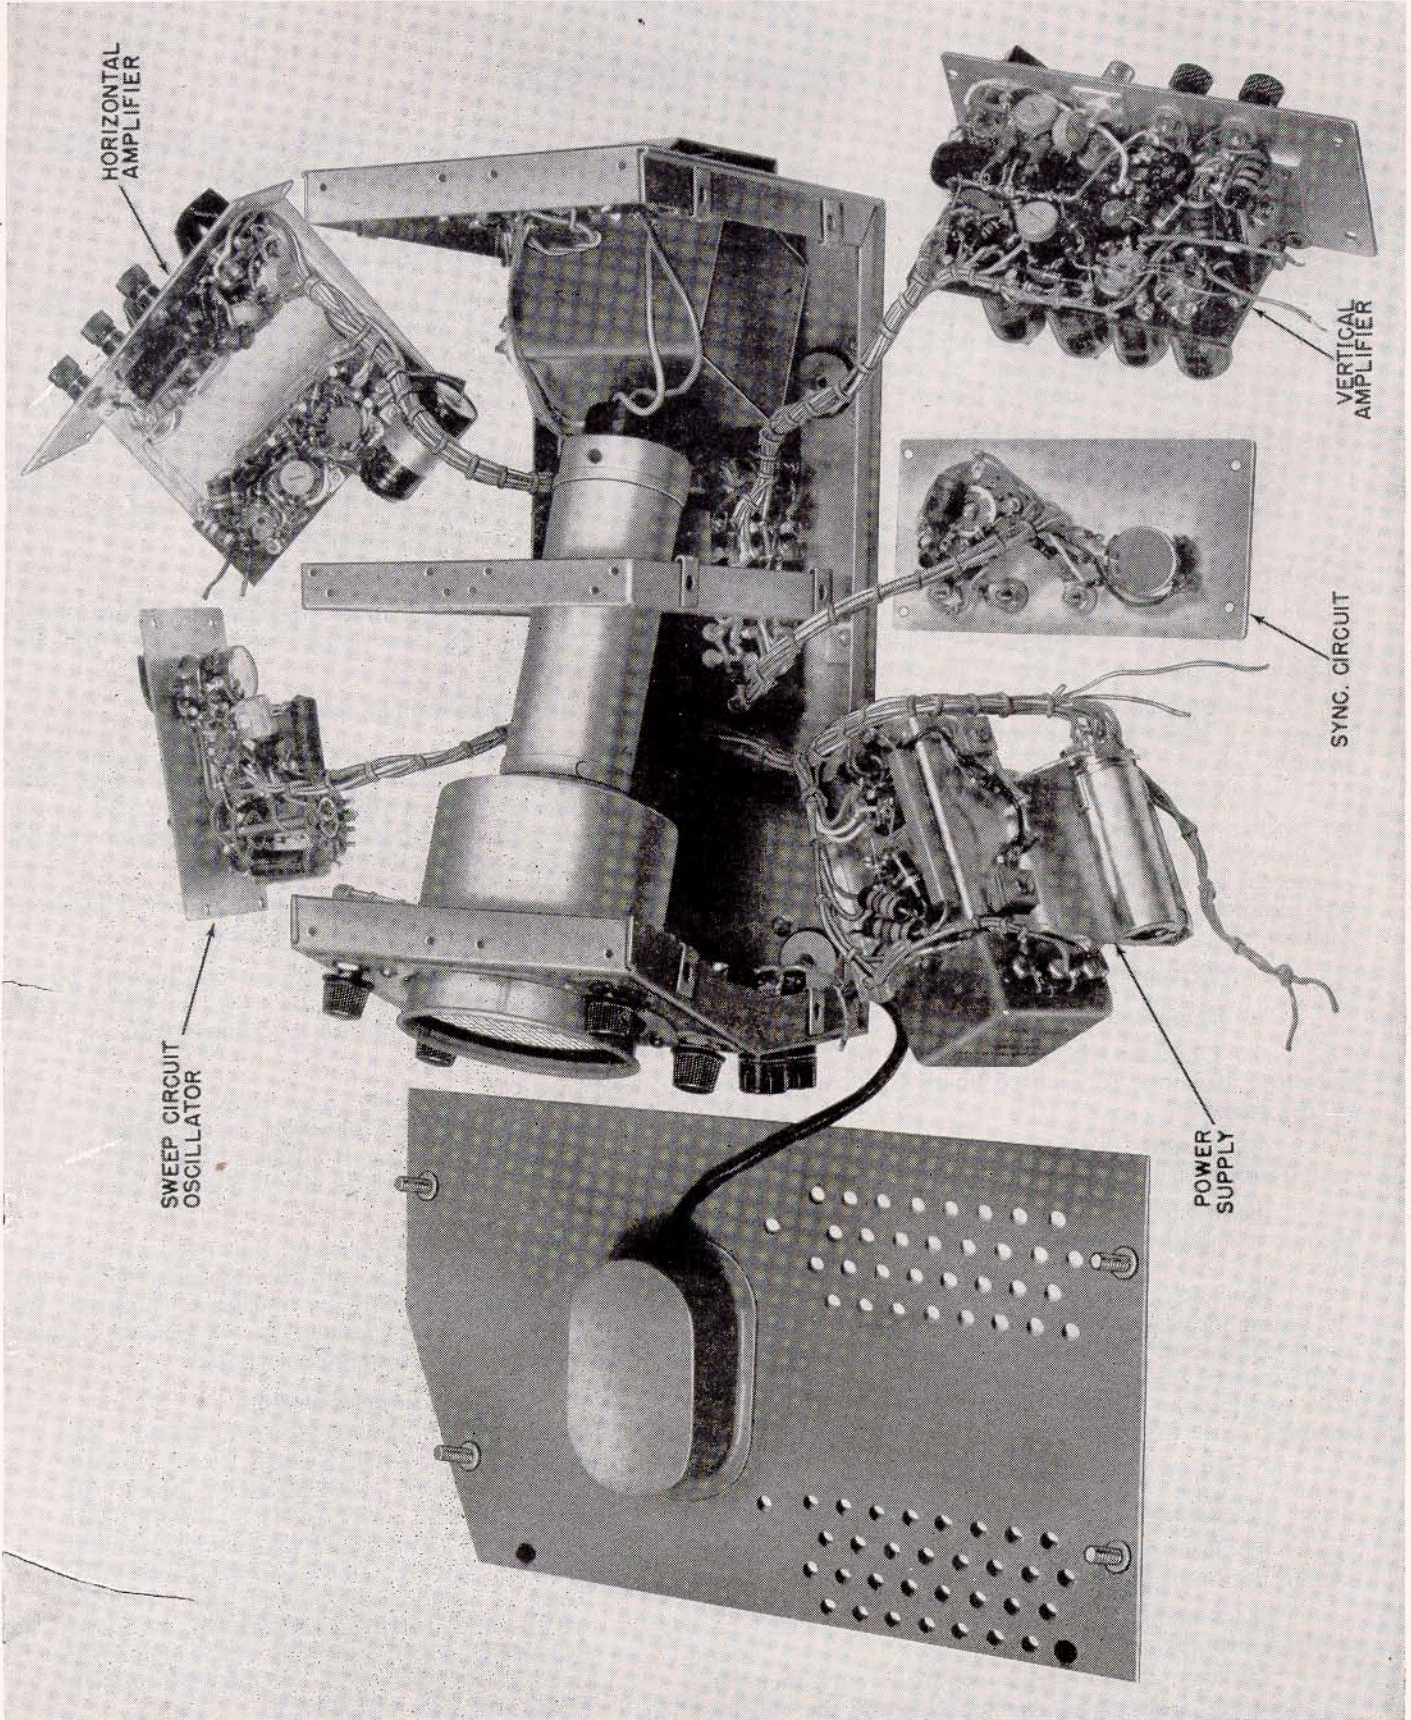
Oscilloscope OS8-B/U, Sub-Assemblies Removed
